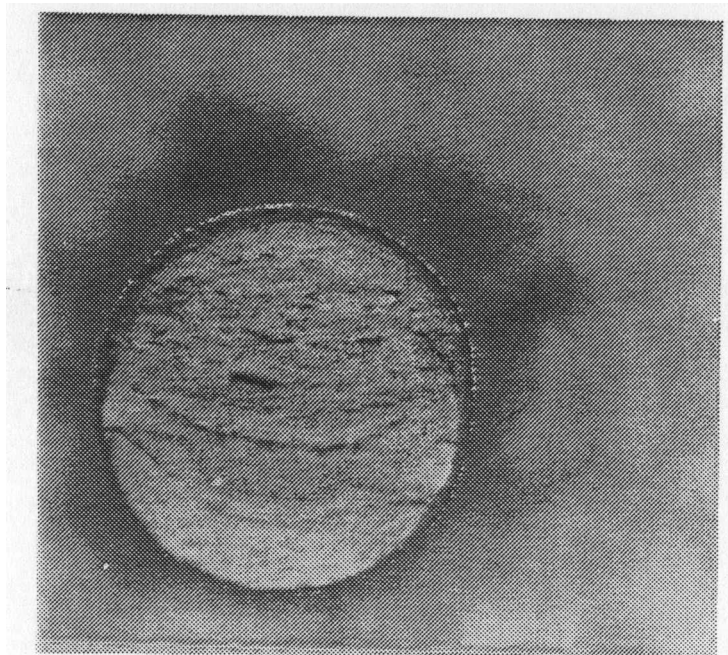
Fracture Surface of Sample No. 9. 36X.
